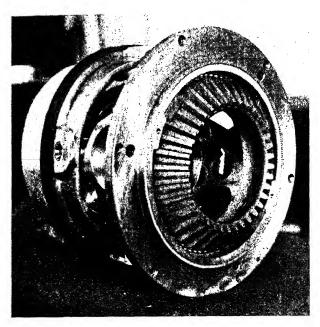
Piston and cam assembly—high pitch position. (Feathered)
